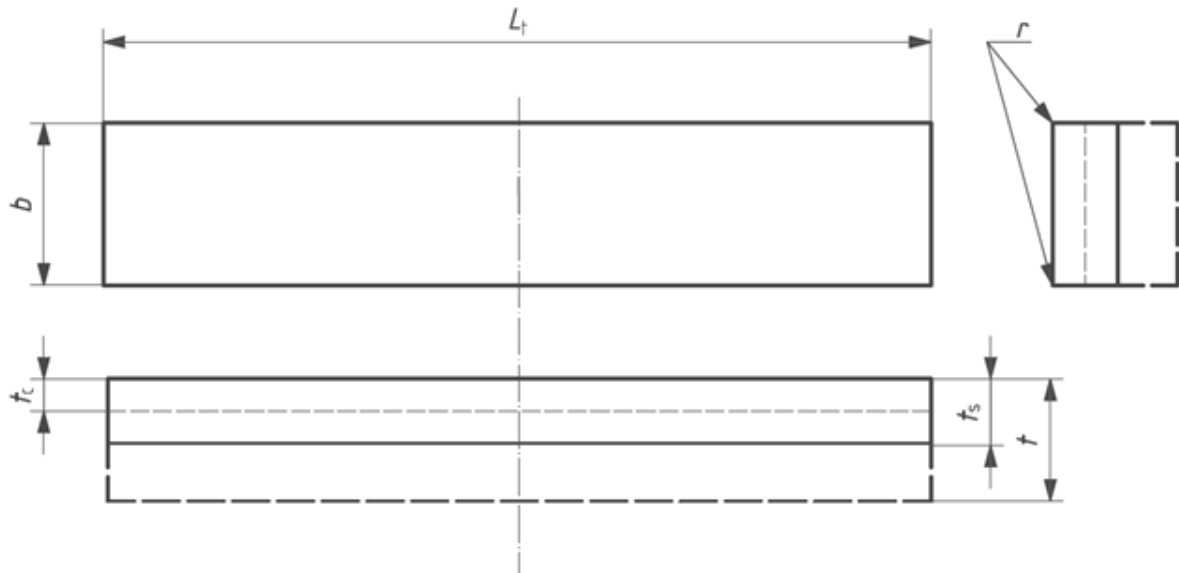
Face bend test specimen for cladding without a butt weld (FBC).
